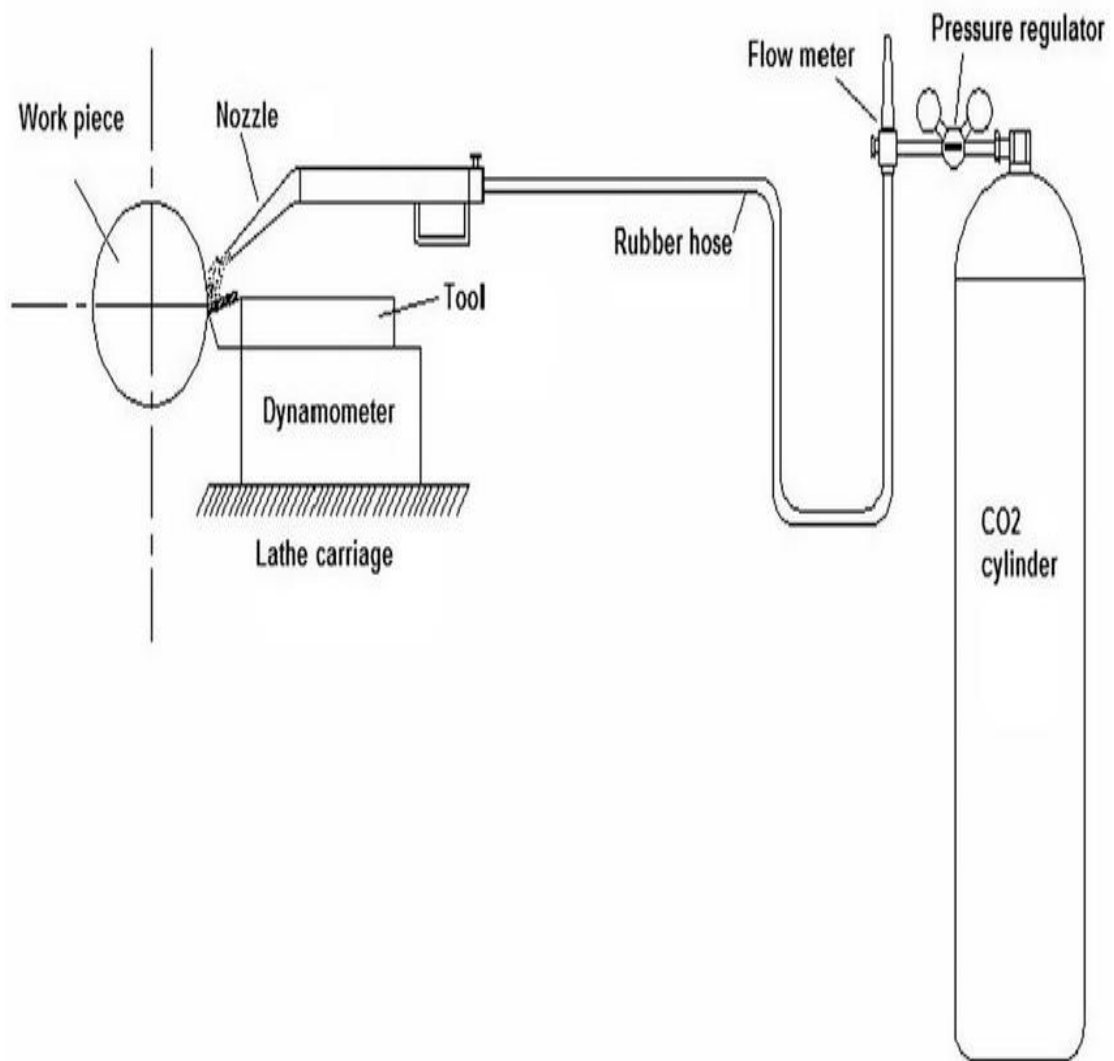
Cryogenic machining [Jerold et al., 2011]
